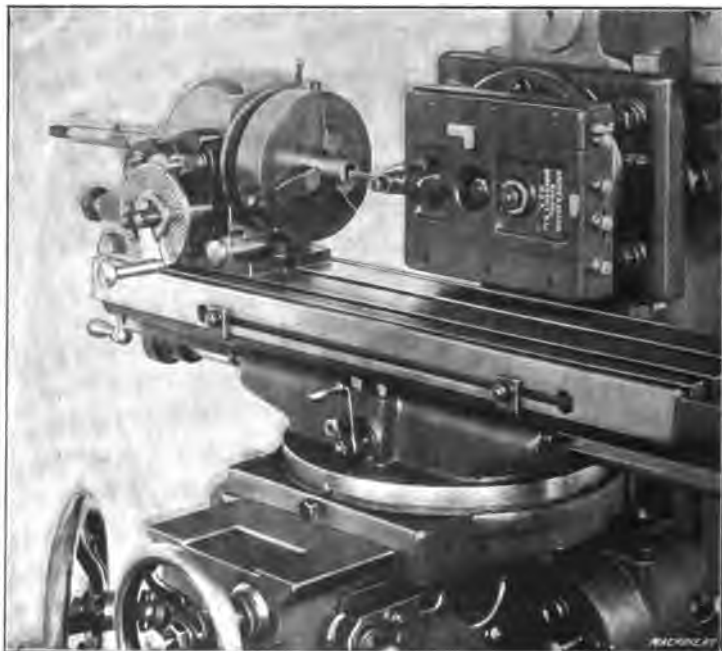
Slotting Attachment finishing Square Hole in Long Rod held in Spiral Head
